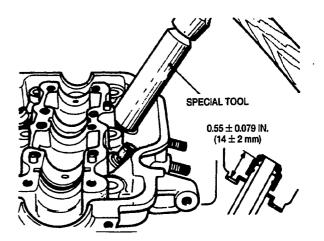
INSTALLING THE VALVE STEM SEAL
